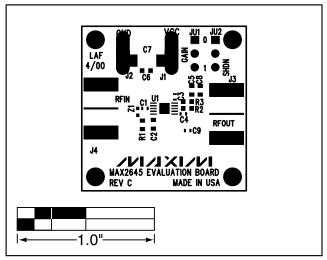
MAX2645 EV Kit PC Board Layout—Component Placement Guide
